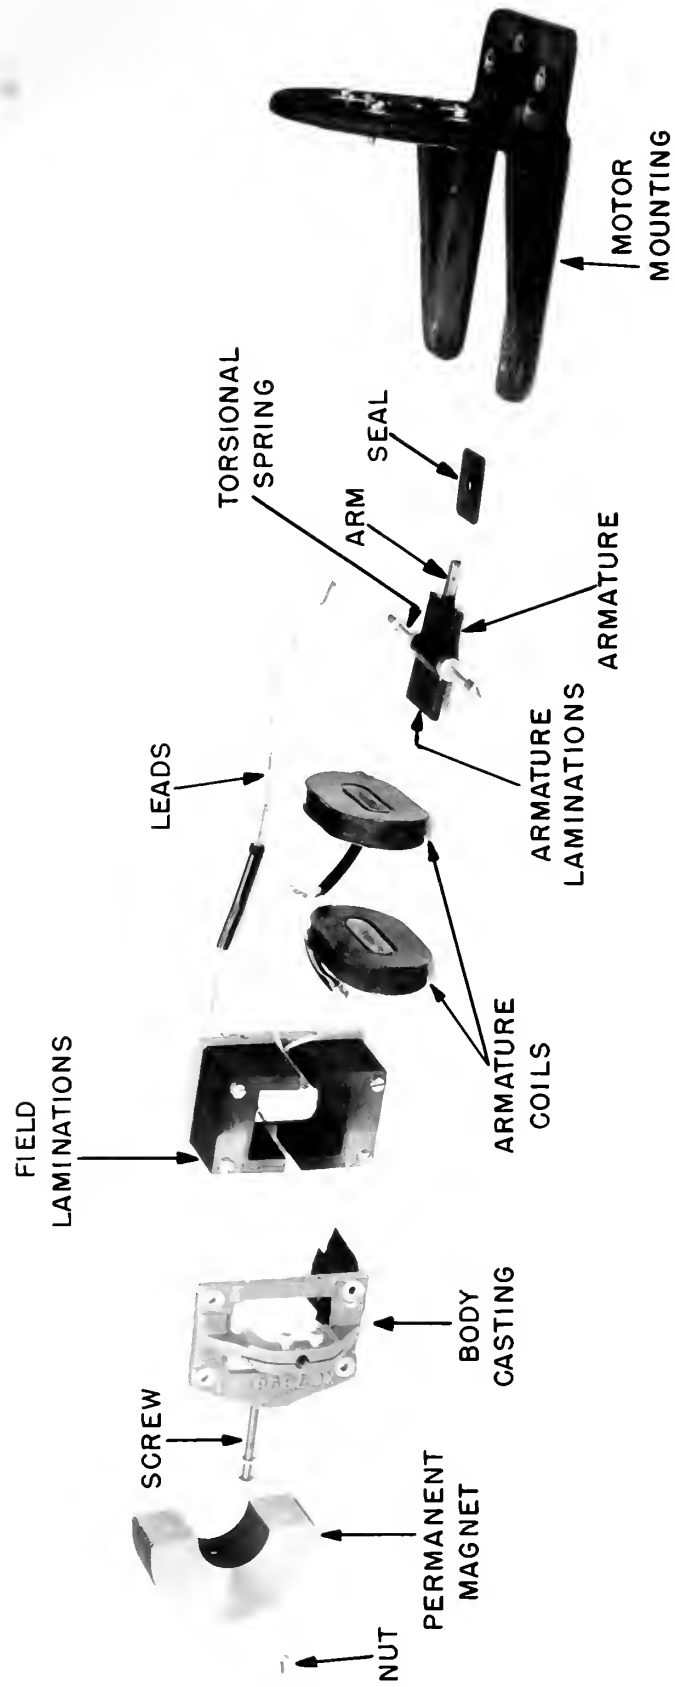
EXPLODED VIEW OF LINEAR TORQUE MOTOR BUILT BY BENDIX, ECLIPSE-PIONEER, FOR THE APPLIED PHYSICS LABORATORY, THE JOHNS HOPKINS UNIVERSITY.
